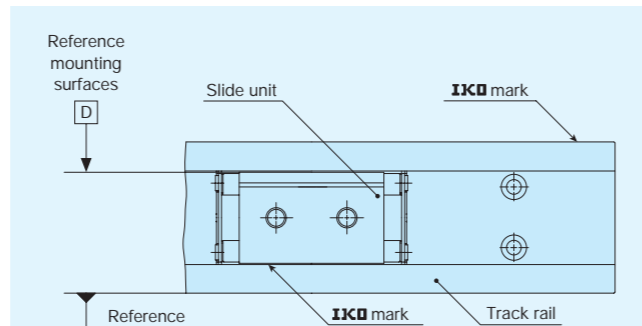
C-Sleeve Linear Way MUL Reference mounting surfaces
